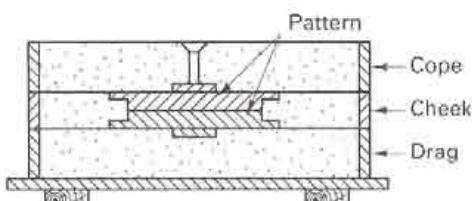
Method of making a reentrant angle or inset section by using a three-piece flask.
